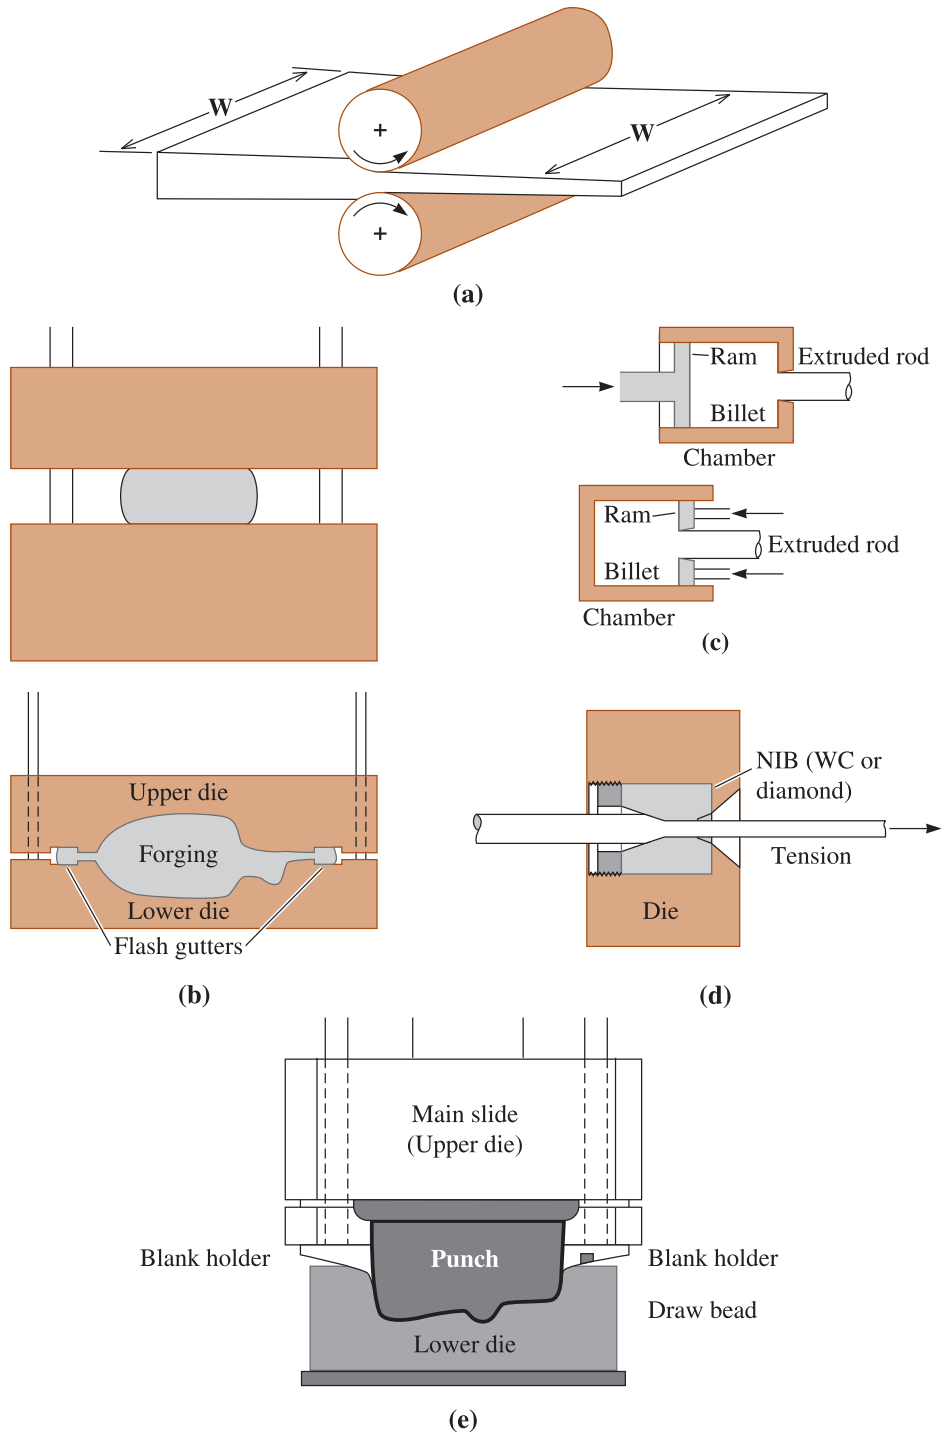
Manufacturing processes that make use of cold working as well as hot working. Common metalworking methods. (a) Rolling. (b) Forging (open and closed die). (c) Extrusion (direct and indirect). (d) Wire drawing. (e) Stamping. (Adapted from Mechanical Behavior of Materials by Meyers, M.A. & Chawla, K.K. 1999, Prentice Hall.) (Source: Adapted from Mechanical Behavior of Materials, by M.A. Meyers and K.K. Chawla, p. 292, Fig. 6-1. Copyright © 1999 Prentice Hall. Adapted with permission of Pearson Education, Inc., Upper Saddle River, NJ.)
